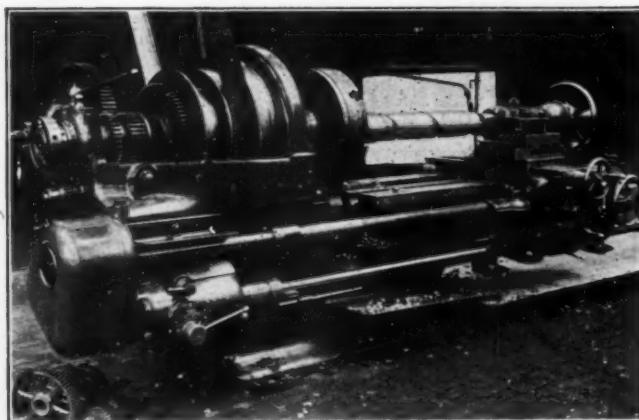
A 24-IN. LATHE CUTTING A SCREW OF 12-IN. PITCH
